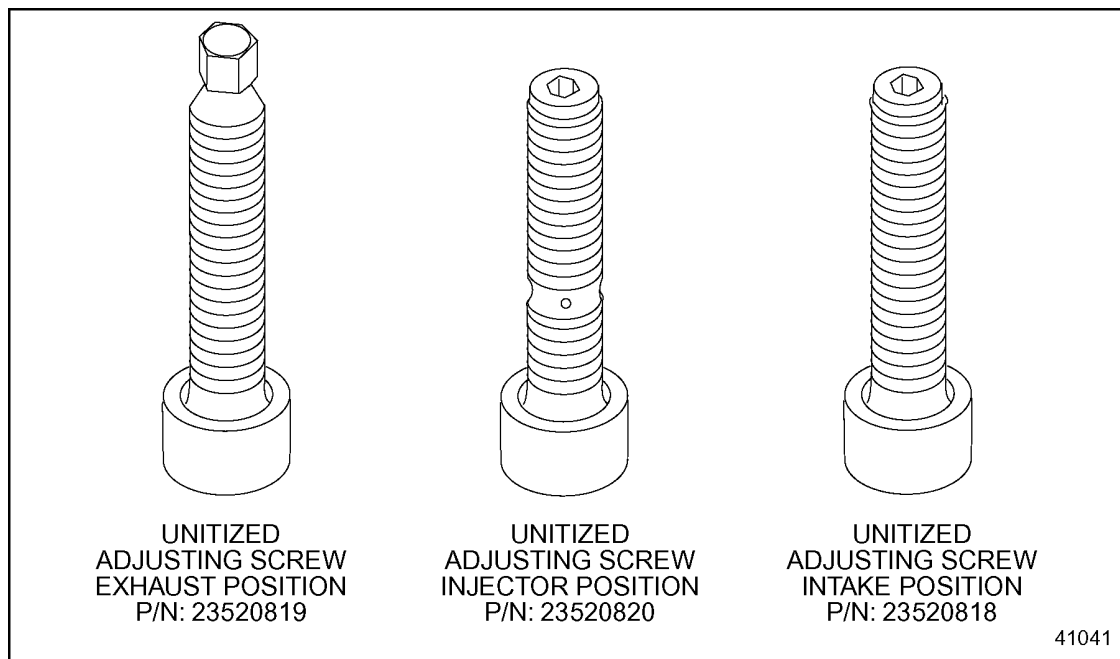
Unitized Valve Adjusting Screw Assemblies (Exhaust, Injector and Intake)
